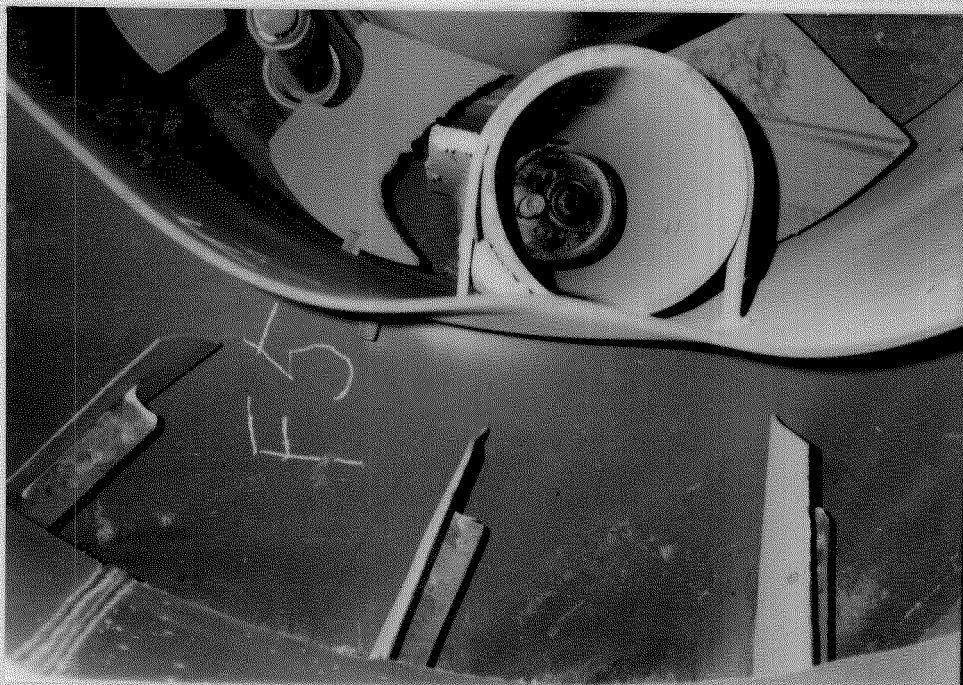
Burner 1F05 inner air sleeve warpage at lighter shroud attachment due to overheating.
